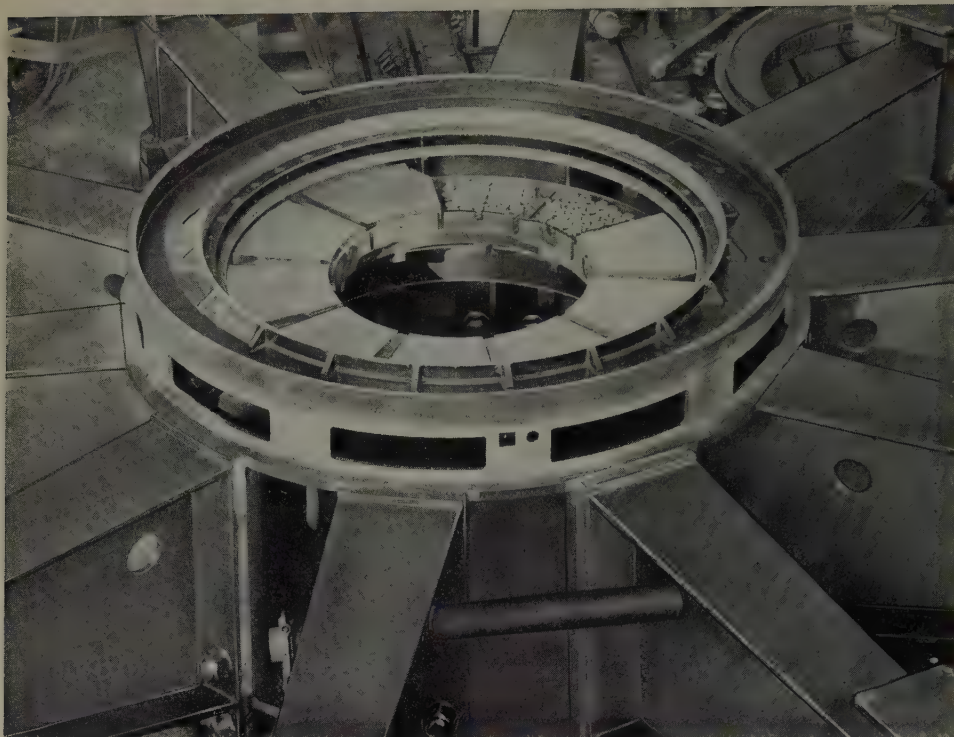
The lower bearing bracket with thrust bearing being mounted in the workshop. The thrust-bearing segments are carried on sets of springs. The segments can be drawn out radially through the openings in the oil container seen at the end of the arms. (51492)
